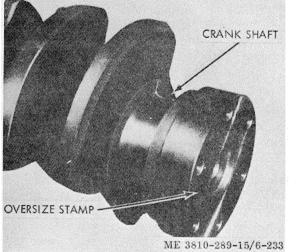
Oversize thrust bearing size mark on crankshaft.
